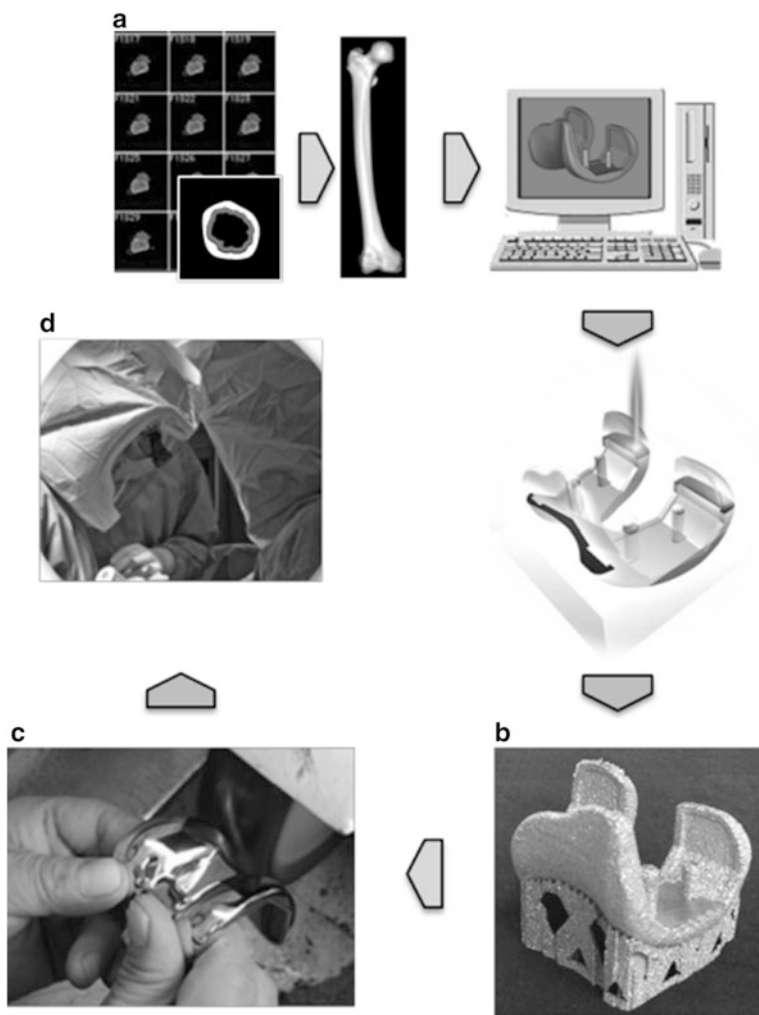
Process diagram of custom-made prosthetic joints using the additive manufacturing. (a) Implant reconstruction/design. (b) Implant manufacturing (additive manufacturing). (c) Post-processing. (d) Surgery
